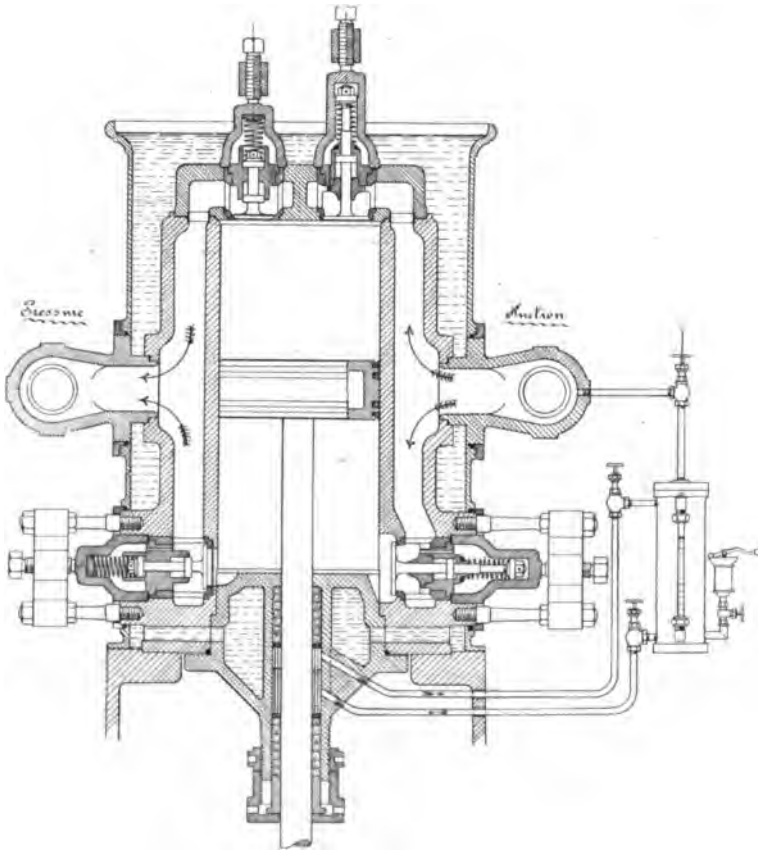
SECTION BUFFALO REFRIGERATING MACHINE CO.'S
